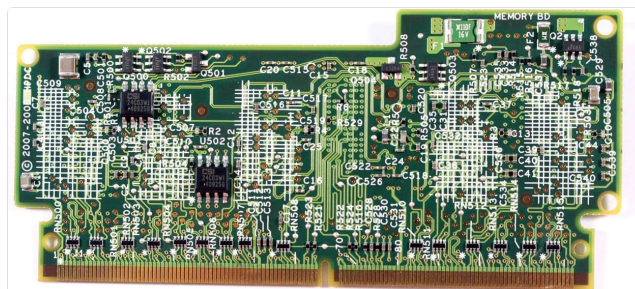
Bottom view of the HP 512MB BBWC module (462975-001) showing the circuit board.
